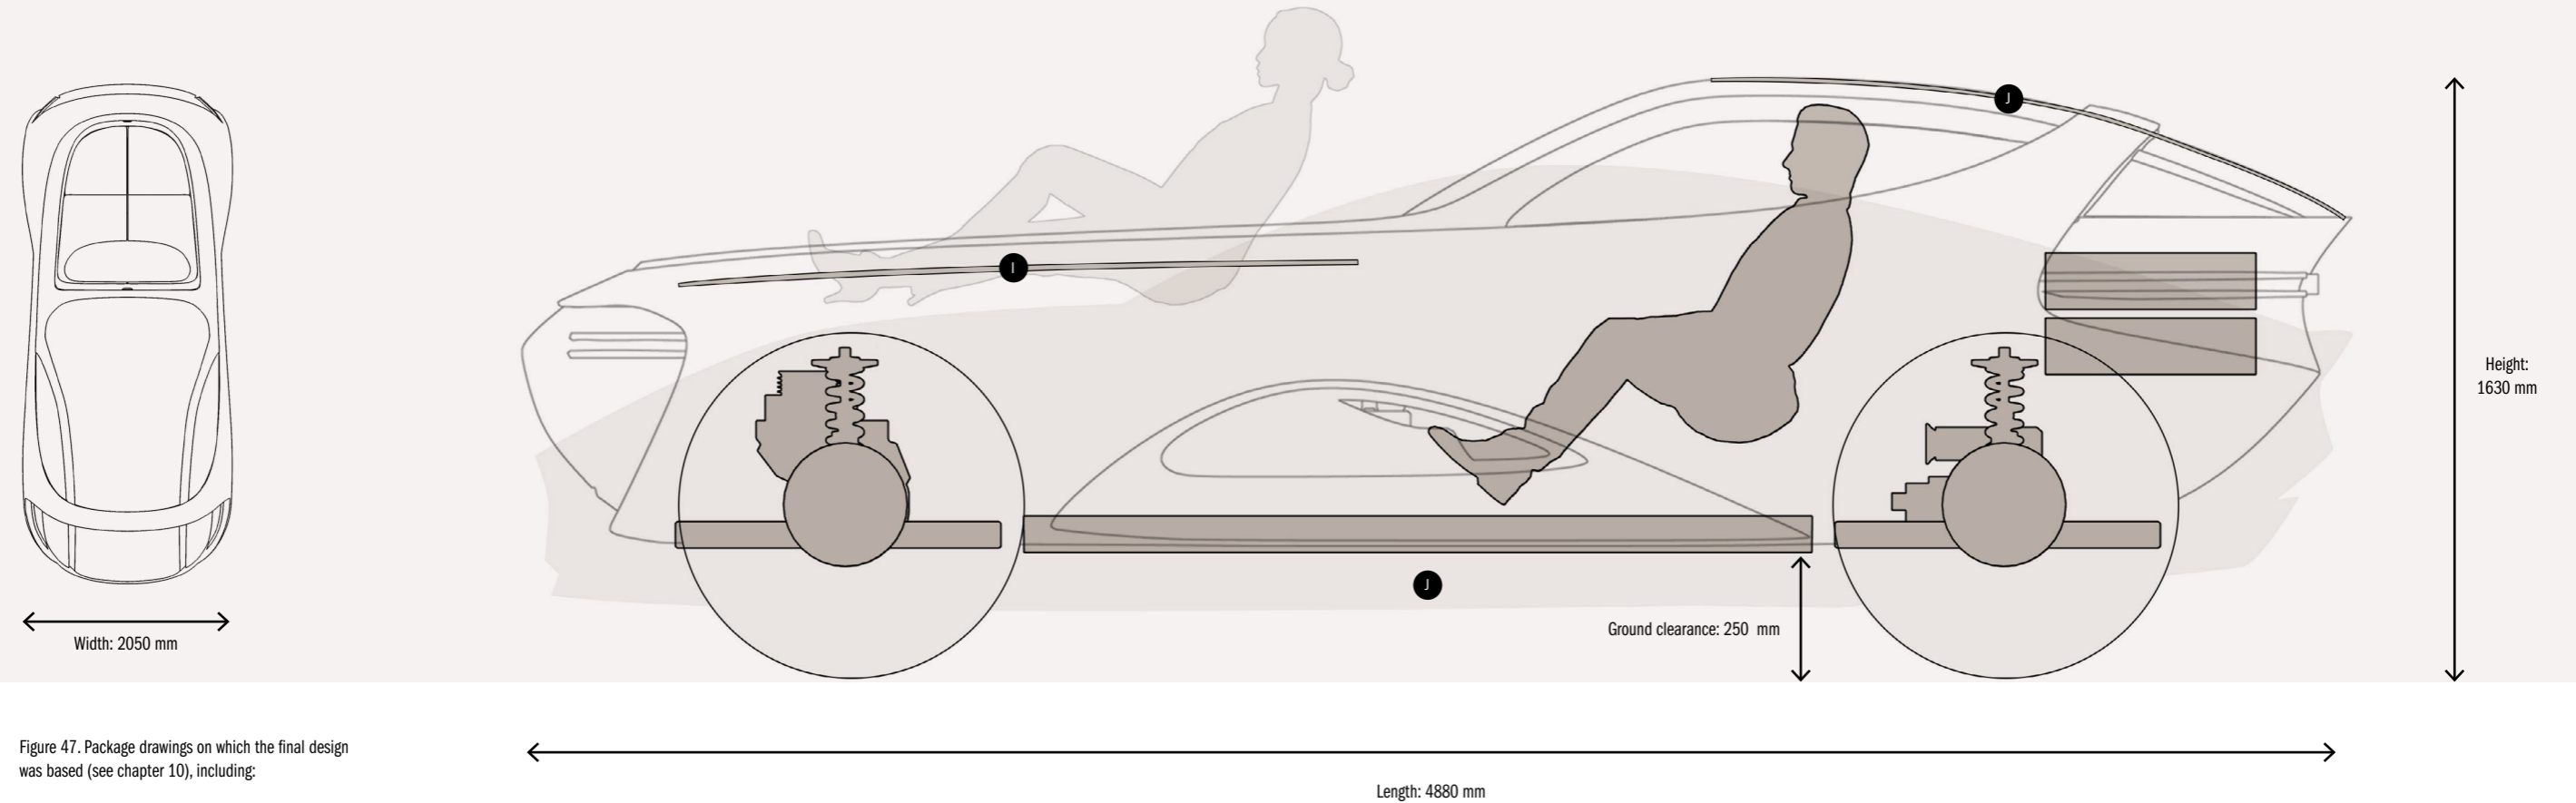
Package drawings on which the final design was based (see chapter 10), including:
